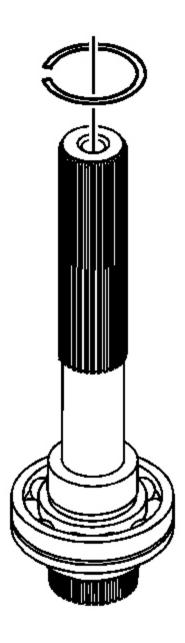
Retaining Ring & Rear Output Shaft Bearing Courtesy of GENERAL MOTORS CORP.
